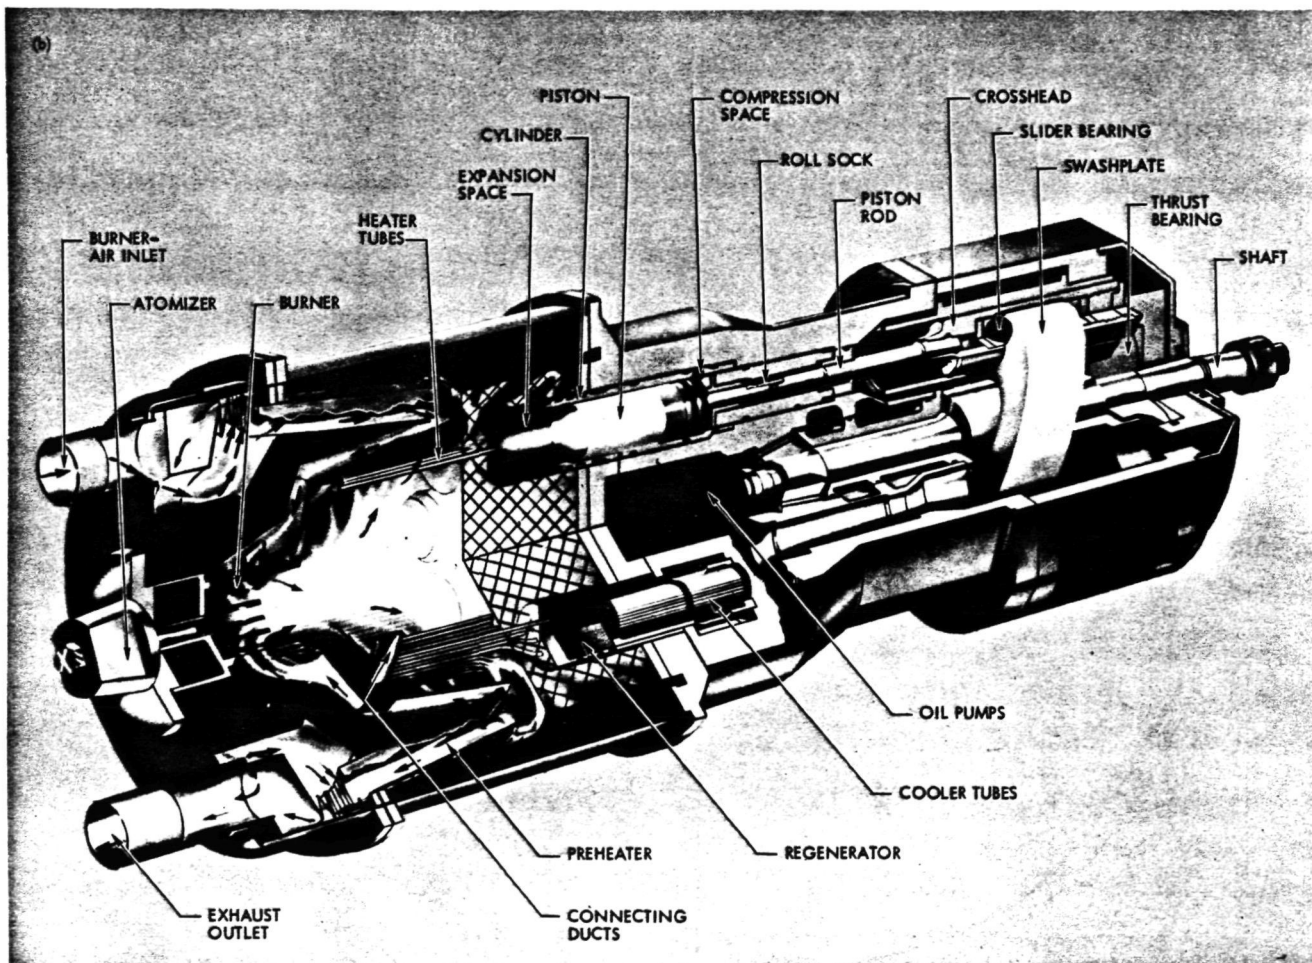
(b) Earlier configuration of double-acting swashplate engine
